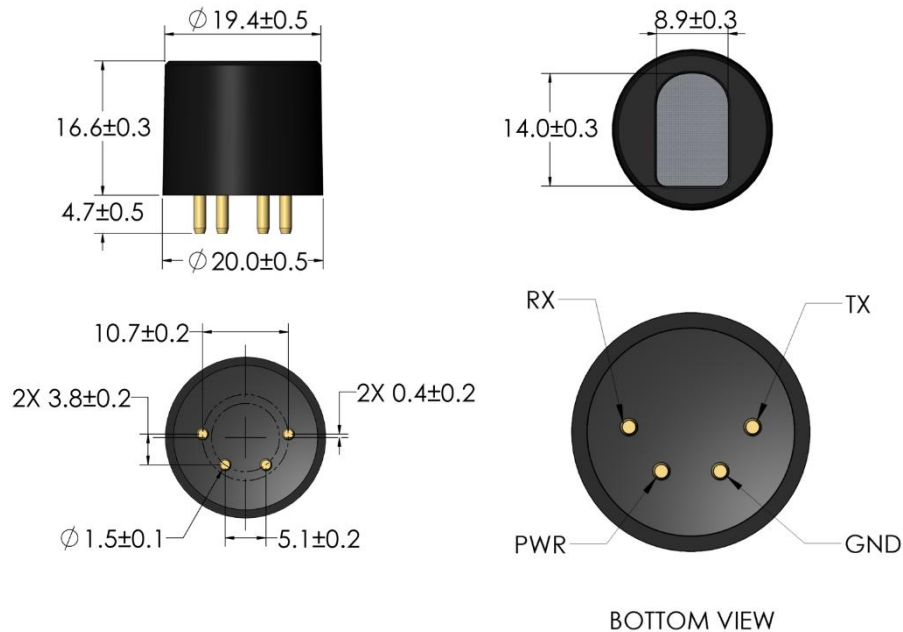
MPS 6.0 ULP mechanical dimensions (in mm) and pinout.
